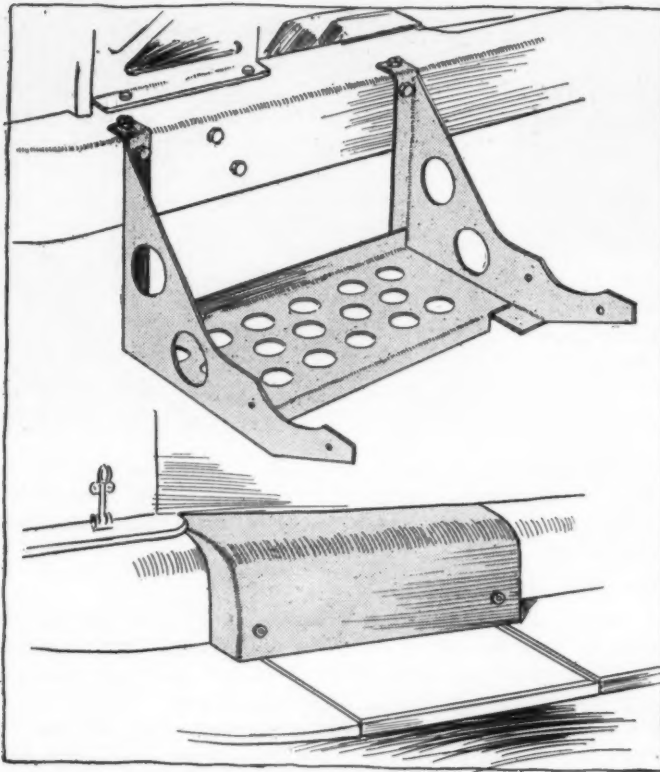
Upper—Steel cradle attached to chassis side member for support of battery
